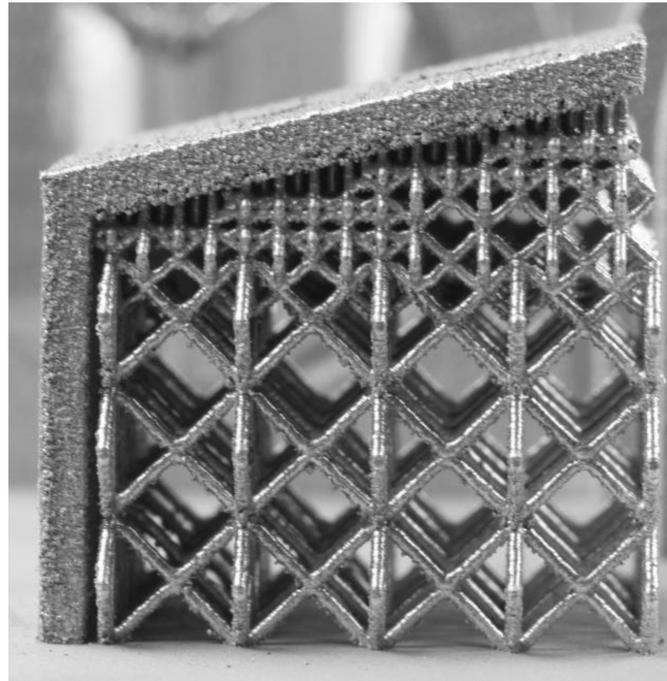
Specimen e) with lattice structure and cone shaped teeth
